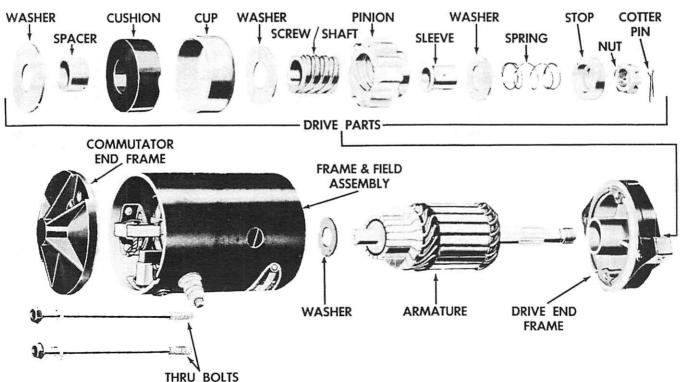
Exploded View of Starter Motor and Mechanism, Delco-Remy
